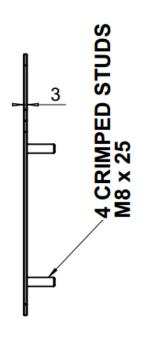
is fixed to the wall face with 4 fixing points D 10
